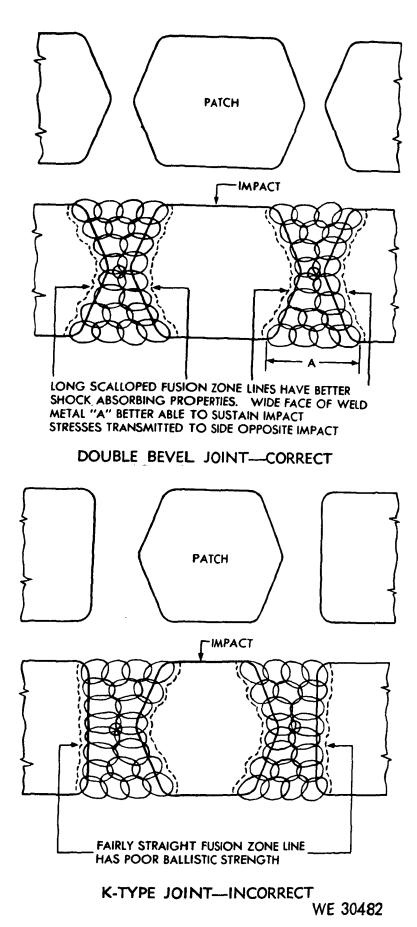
Correct and incorrect plug weld penetration for repairing shell penetration in homogeneous armor plate.
